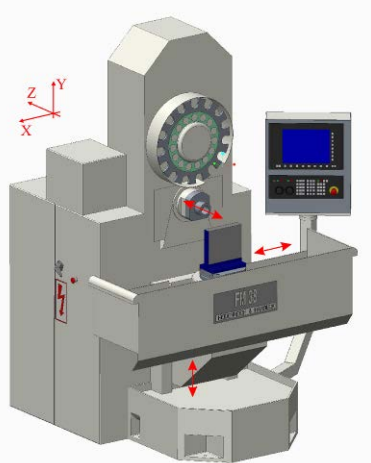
CAD model of the CNC Horizontal Machining Center H&H FM38
